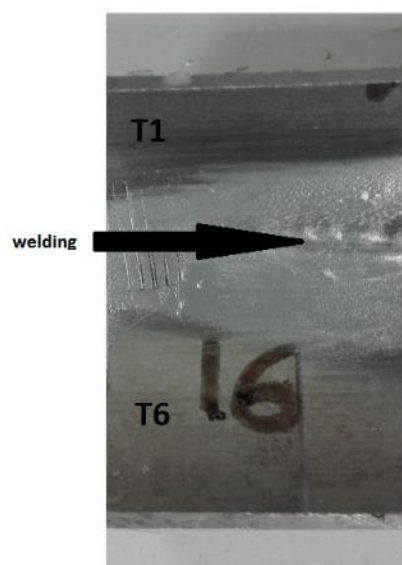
Photograph of the welded T1-T6 pipes.
